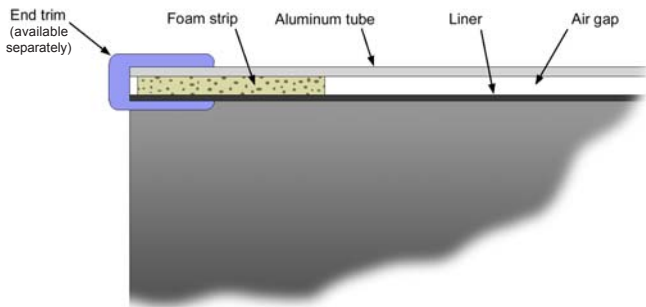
Cross section of typical tube end detail showing placement of foam strip and end trim.
